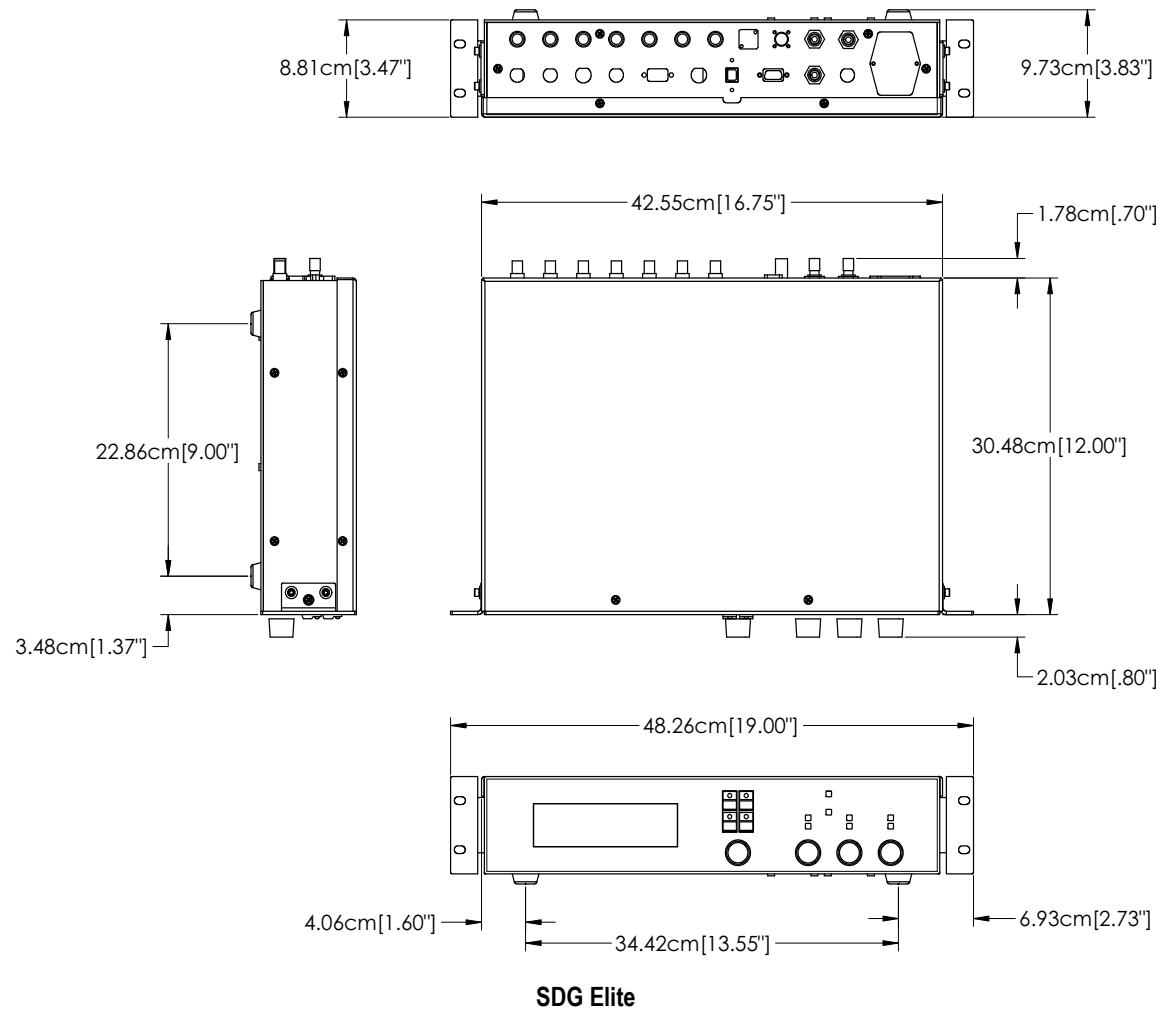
Astrella Optical Bench Assembly & External Component Dimensions (Continued)
